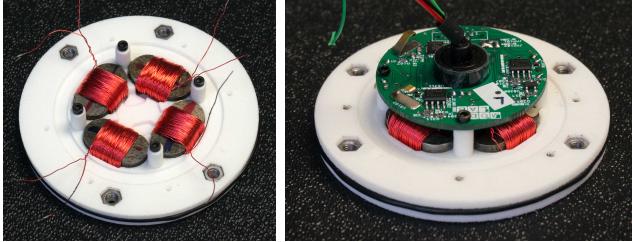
Left: Internal view of magnets in EP-Face. Right: Internal view of EP-face with circuit board and slipring.
